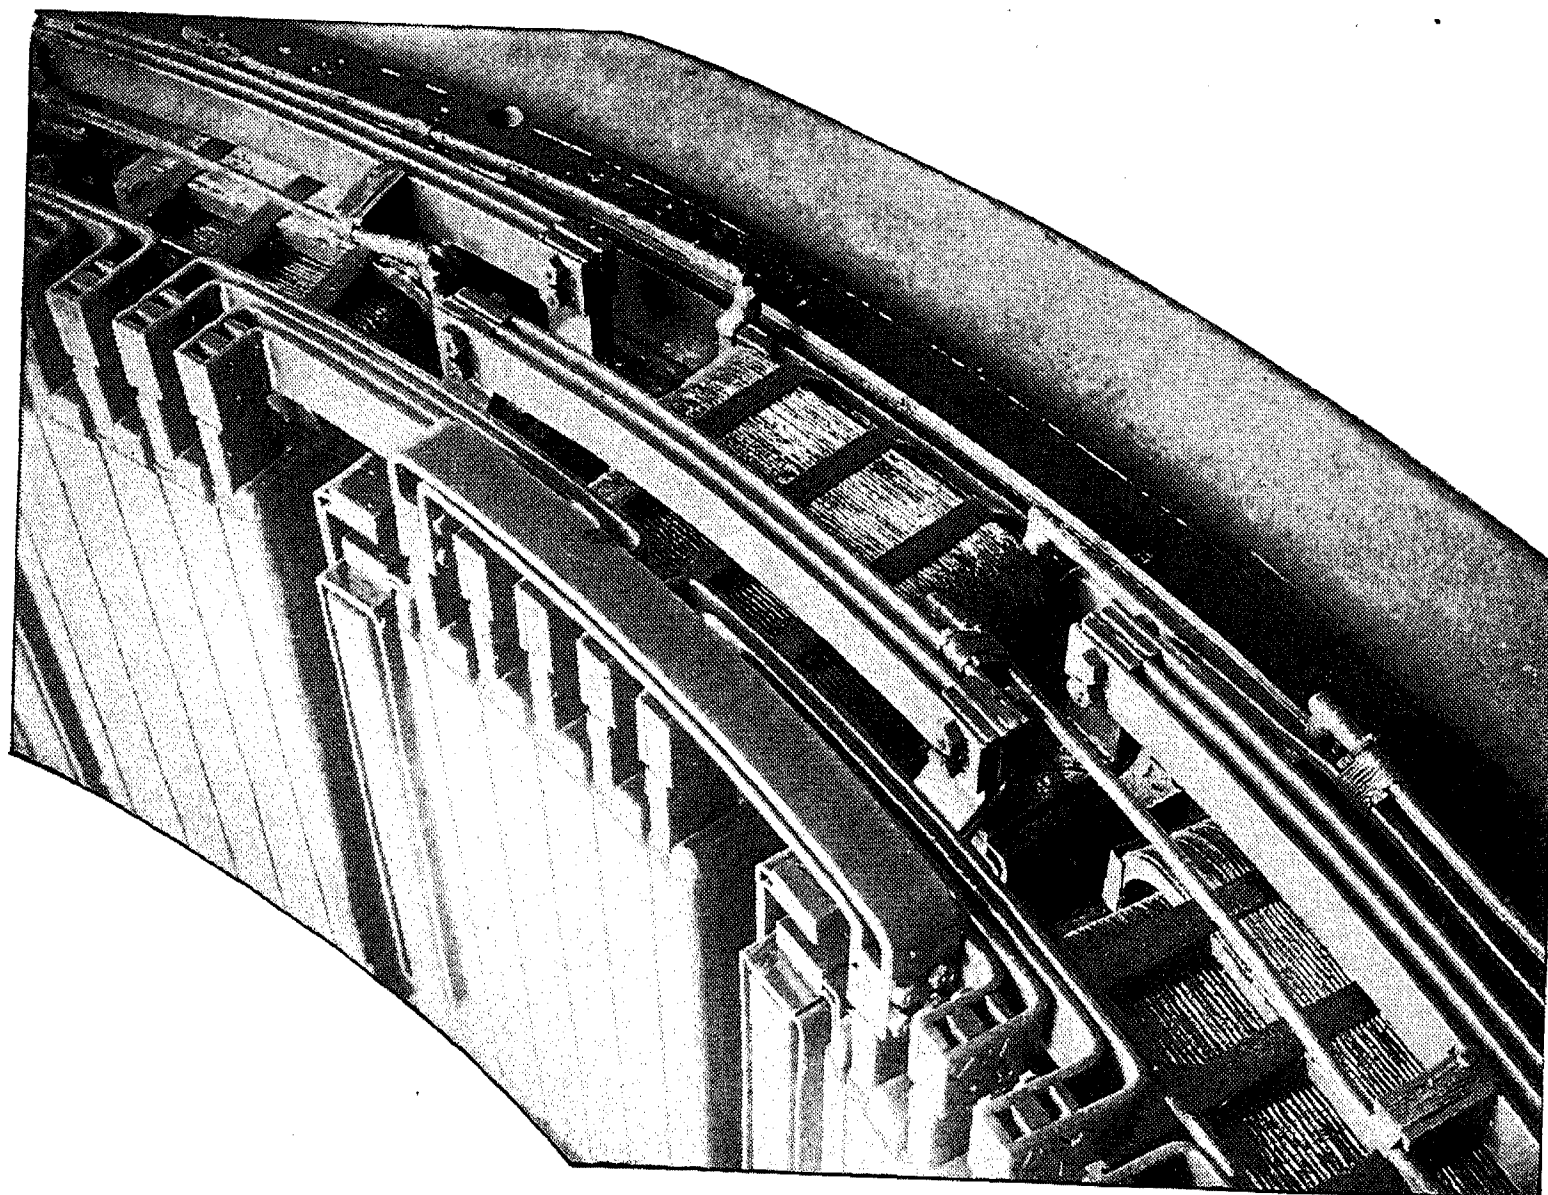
COMPENSATING AND COMMUTATING POLE WINDINGS AS USED IN REVERSING MILL MOTORS [SYKES]
